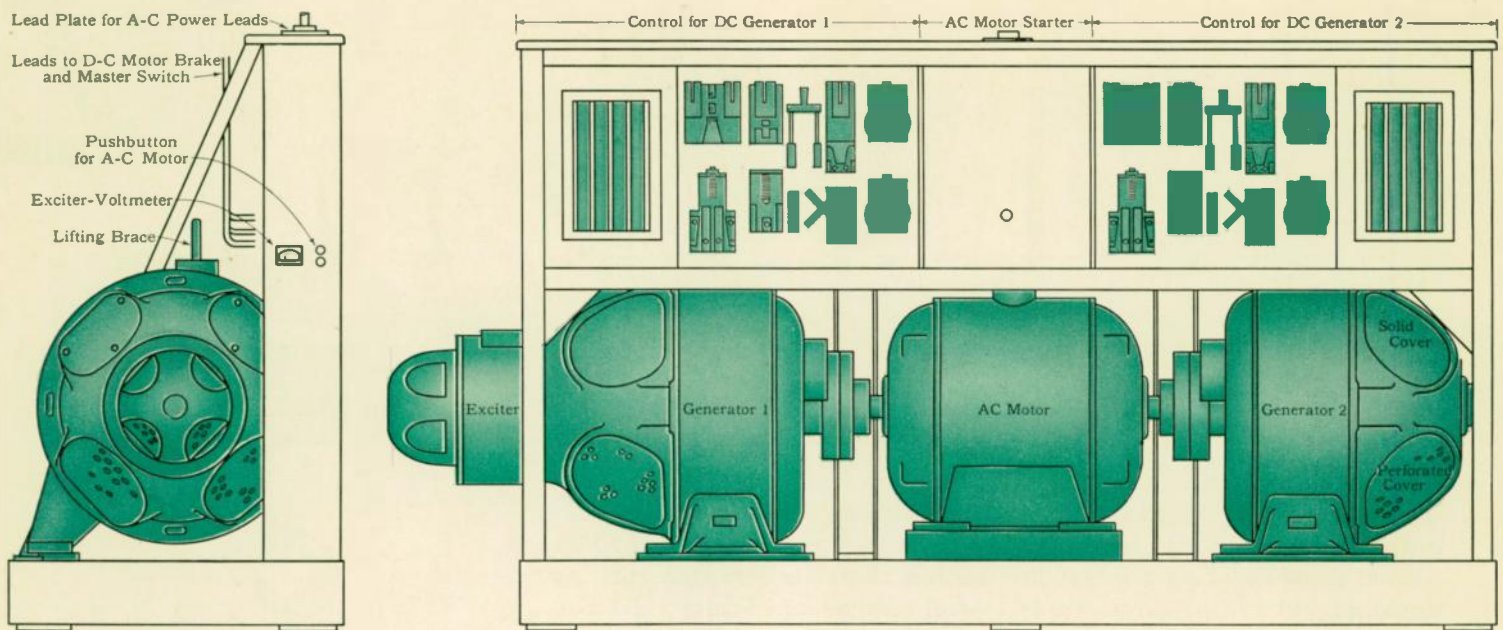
Complete drive is a single, compact unit: a motor, two generators, and exciter on one shaft. Control is above the machines.
